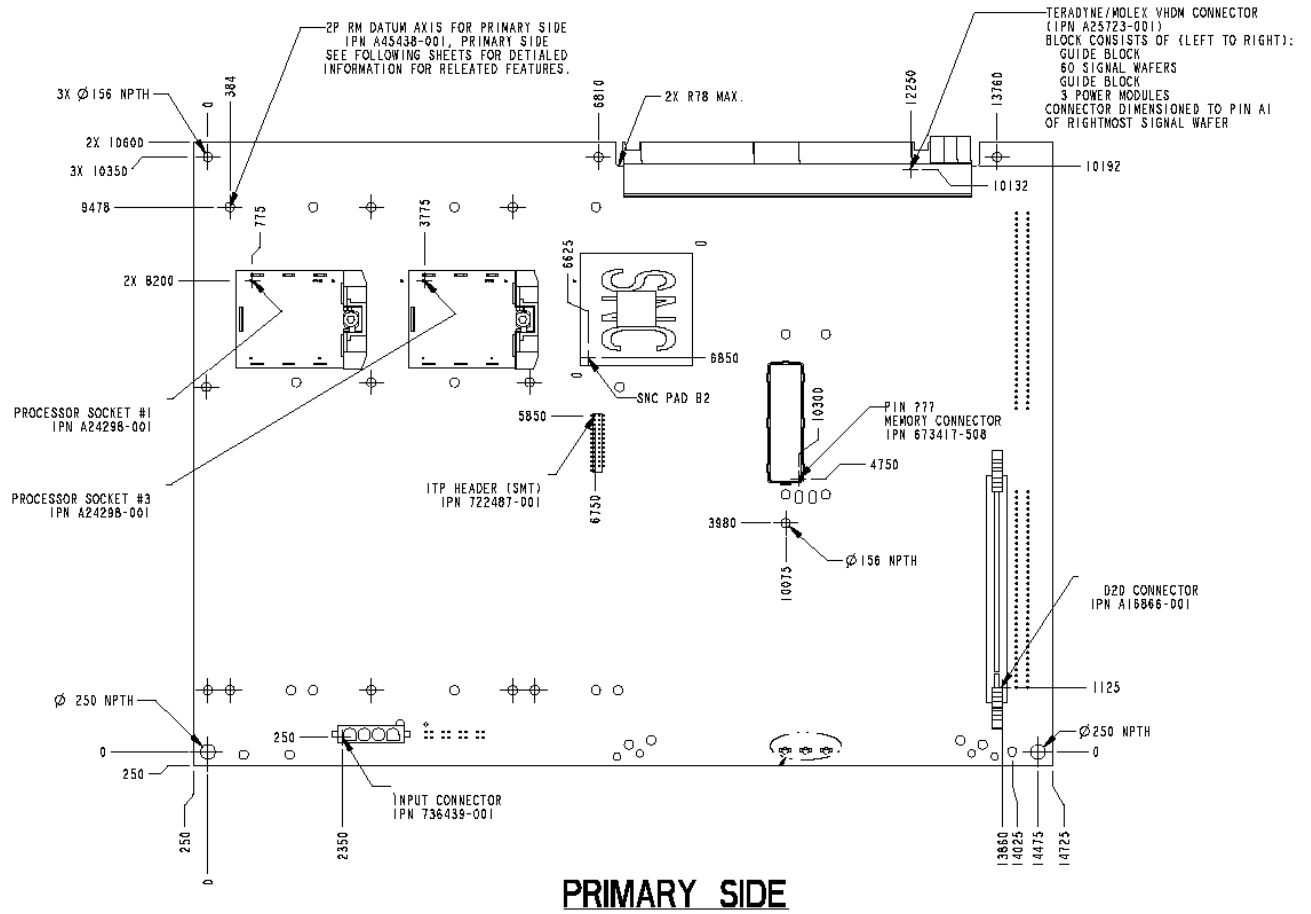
Processor Baseboard Mechanical Drawing (Primary)
